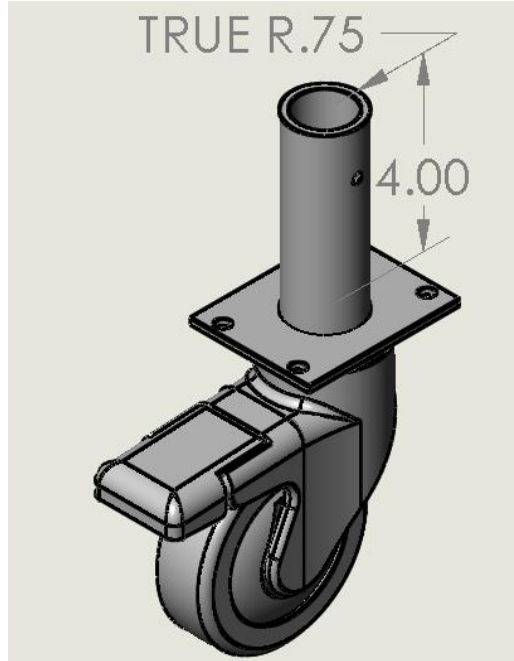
Modified wheel design with added pipe to attach to the foot. Dimensions in inches.
